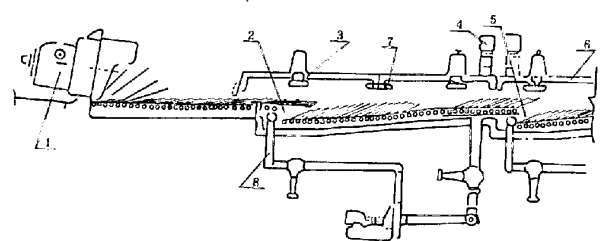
Layout of NSC KAMAISHI wire rod mill
